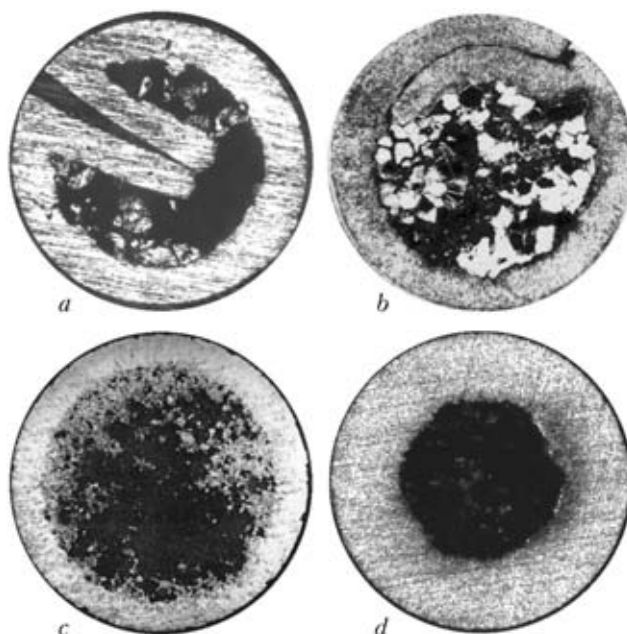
Different designs of flux-cored wire sheaths: *a* — rolled with double bending of edges; *b* — rolled with edge overlapping; *c* — seamless wire manufactured by continuous filling of U-shaped profile of tube billet with flux with subsequent welding of the longitudinal butt of the wire sheath; *d* — seamless wire manufactured by filling pre-welded tubular billet
